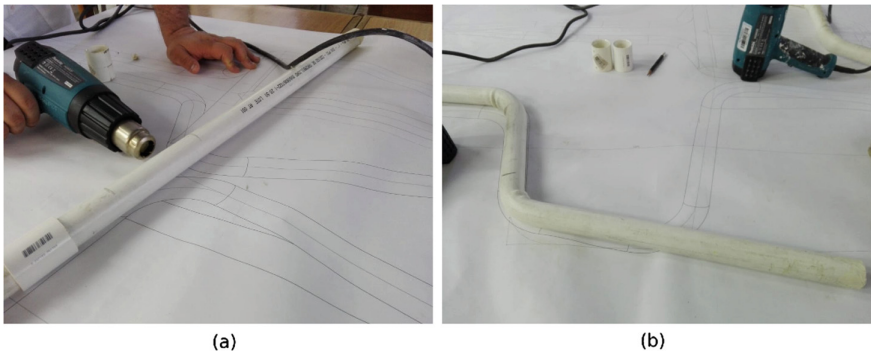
Construction of a rudimentary prototype of the wheelchair using PVC tubing, heat guns and technical drawings of the frame. Detail (a) shows the heating of the PVC tubing and detail (b) shows the bent tubing over the technical drawing of the frame.
